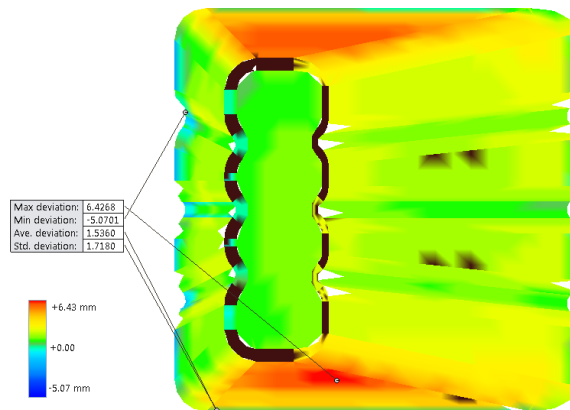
Hand layup sheet metal moulds dimensional measurement results
